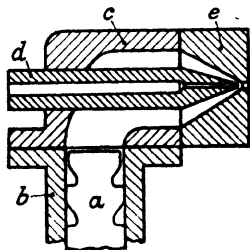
Cross-section of rectangular-feed-type extrusion head
